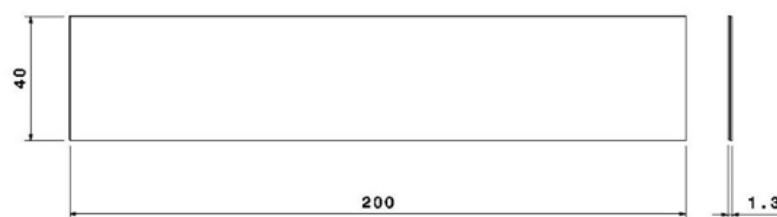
Dimensions of fiber metal laminates fatigue test in millimeters (mm)
